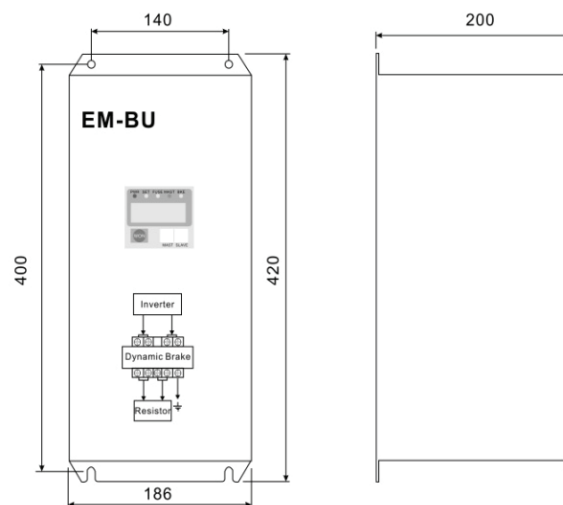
Dimensions of EM-BU2/BU3 braking units
